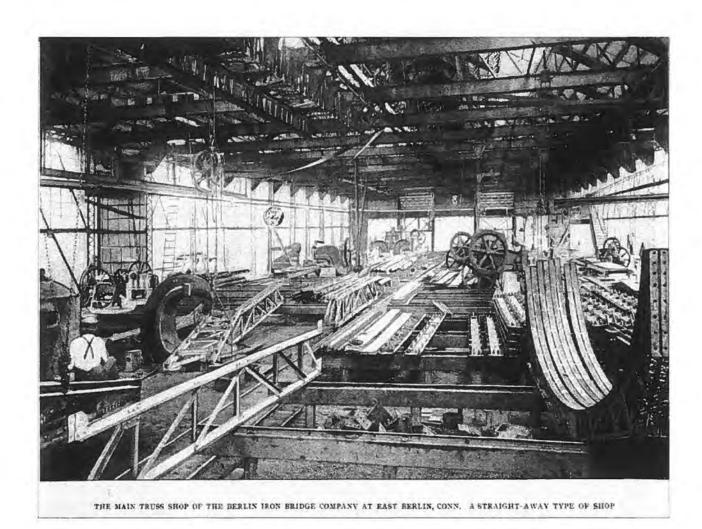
Riveting shop (truss shop) of Berlin Iron Bridge Company, East Berlin, Connecticut. (Source: Charles Evans Fowler, "Some American Bridge Shop Methods, <u>Cassiers Magazine</u>, 17 [January 1900], 206).
